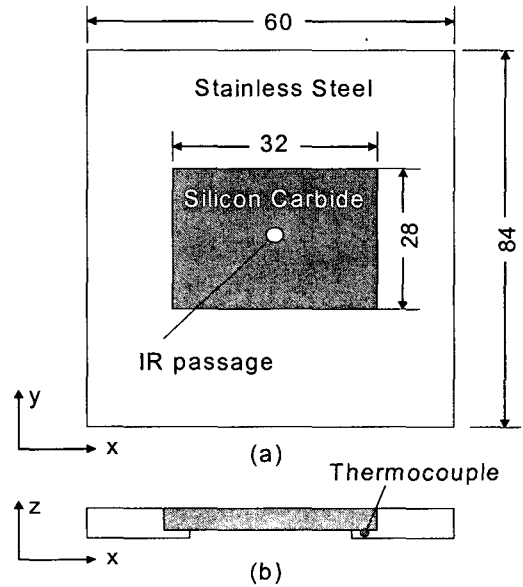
The modified version of heating tool consisting of two bodies: a SiC working plate and a stainless steel supporting plate. (a) plane view; (b) frontal view
